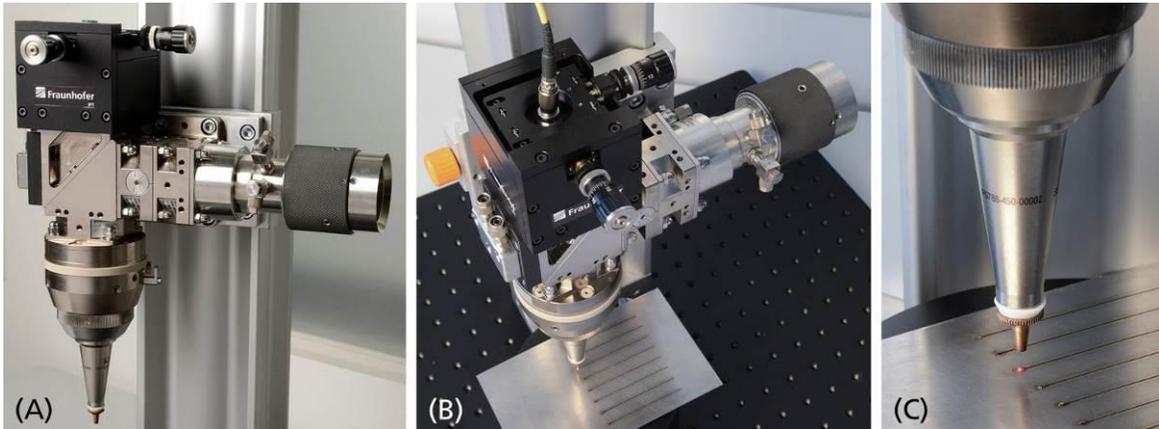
(A) (B) (C) Laser cutting head with a coupling unit for the integration of the inline distance measurement system
